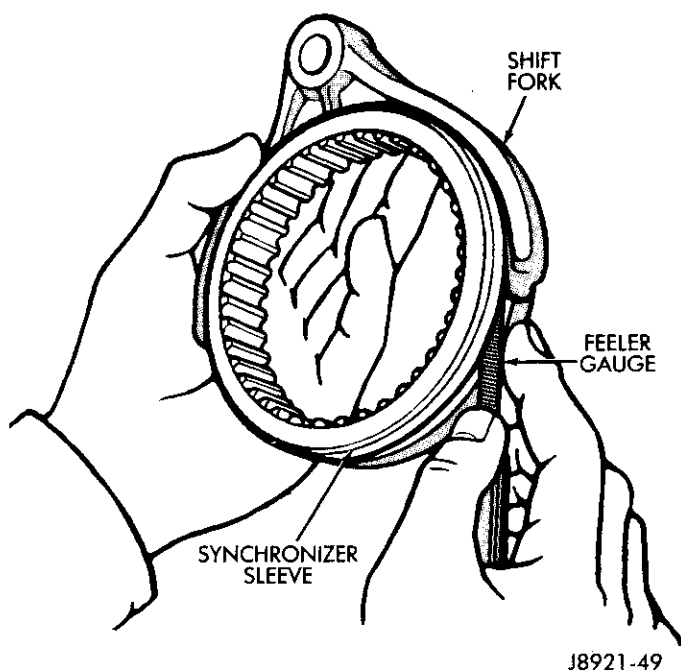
Checking Shift Fork-To-Sleeve Clearance
